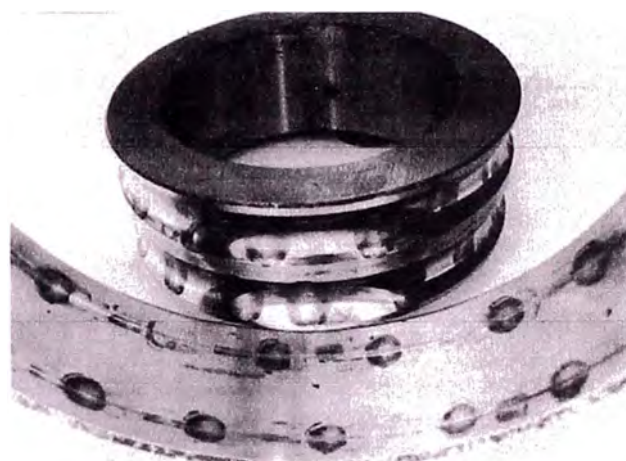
Contact corrosion on a ball bearing inner ring and outer ring raceways
